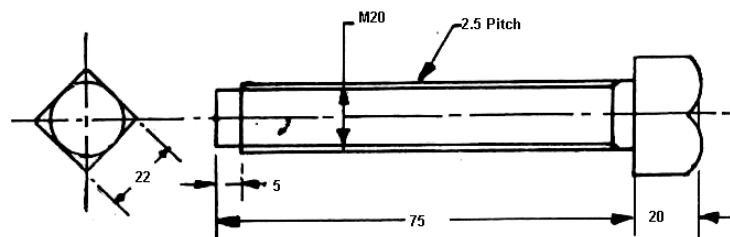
FORCING SCREW M20 (Tool No. 1405975)
